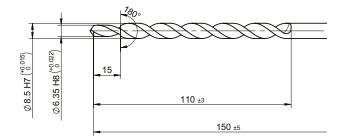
Step drill Type 1337A2 for mounting nut 3/8-24 UNF
